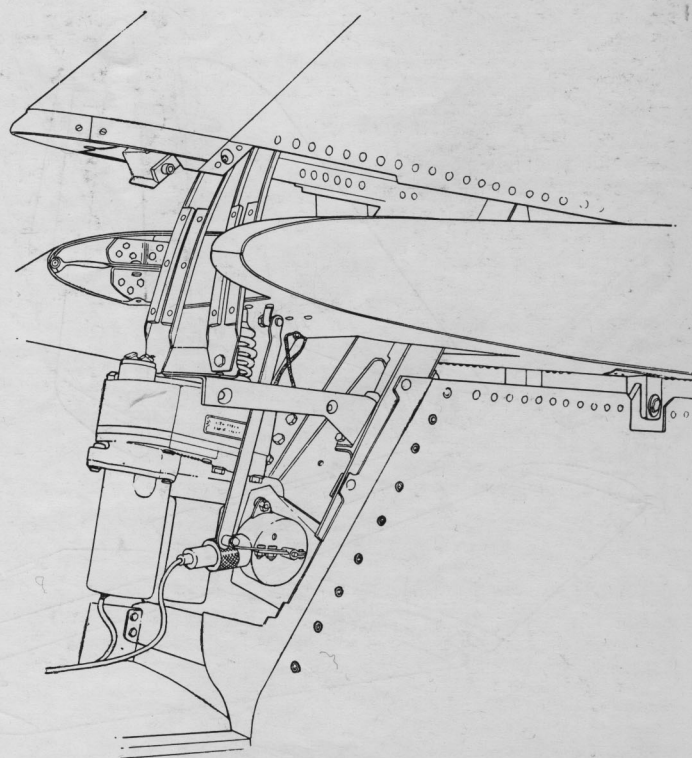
Close-up of the stabilizer adjusting motor and screw jack which is bolted to the upper section of the aft fuselage. Guides just above the jack have slots to take retaining pins in the L.E. of the stabilizer fairing.
